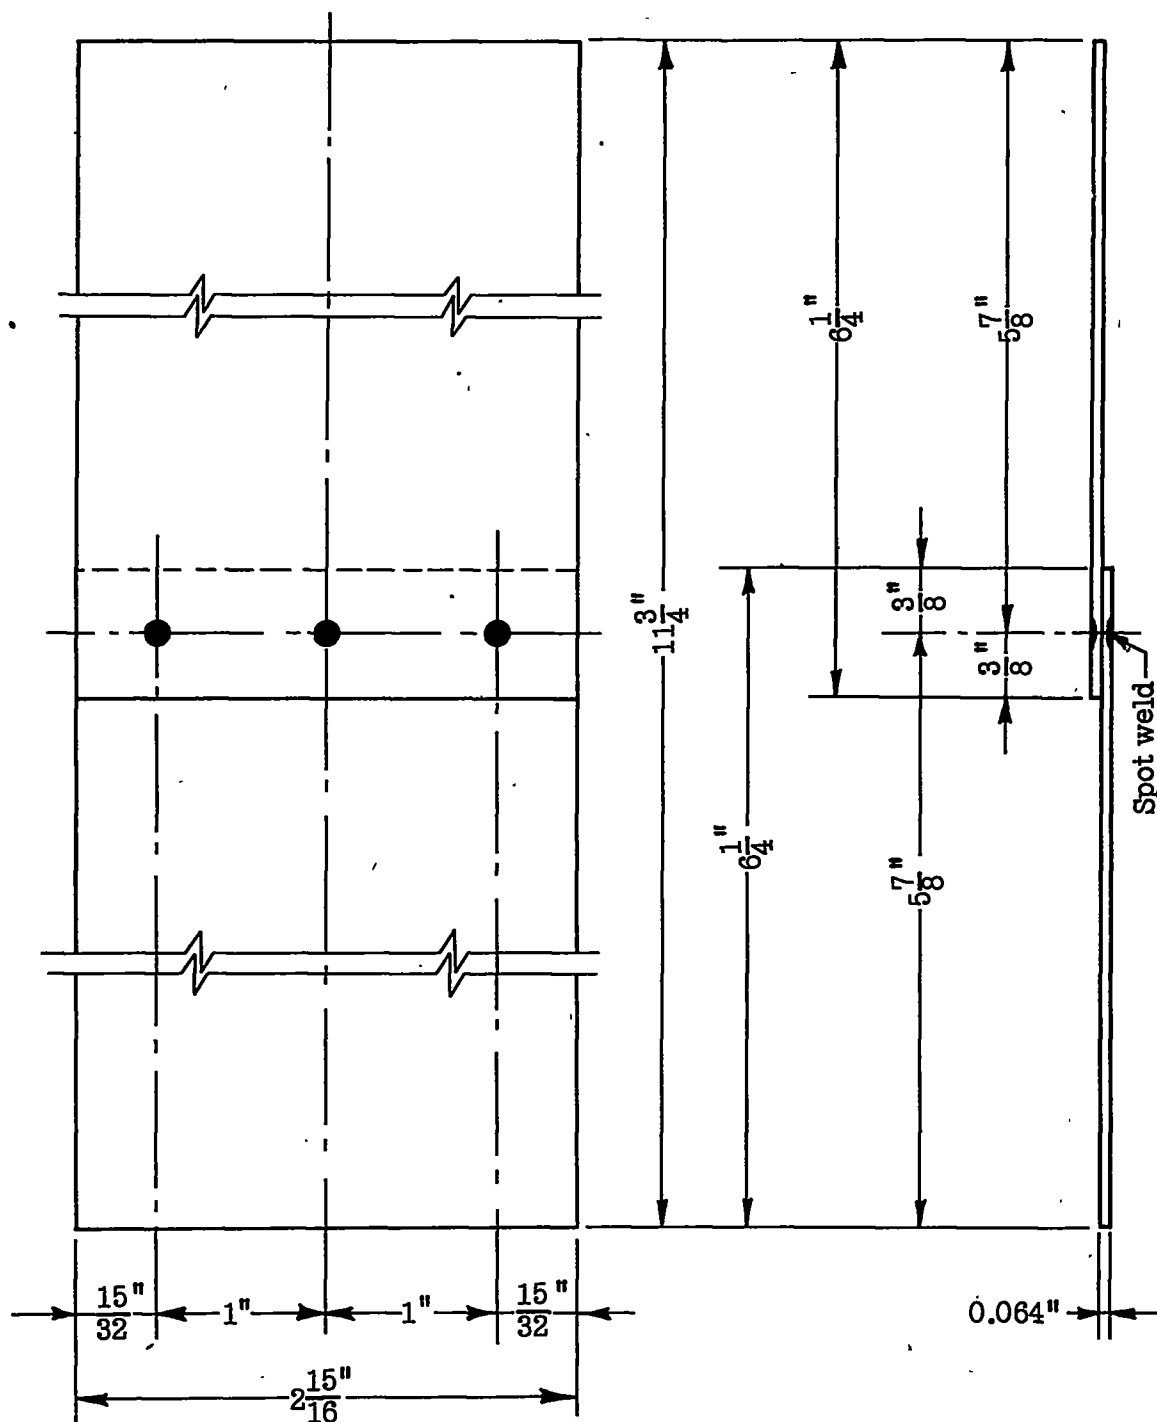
Panel for static tests of spot-welded joints.
